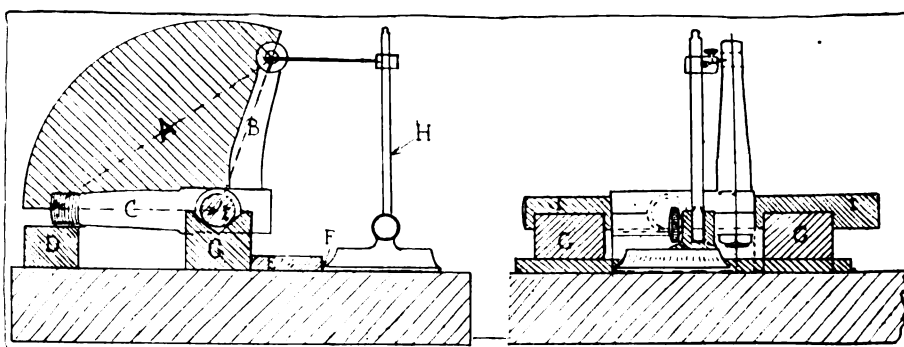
Method of making alignment test using a machinist's surface gauge. D is a solid bar; G, a machinist's V-block; I, the king pin or a substitute; A, the template; H, the surface gauge which is held against the bar E at the point F
